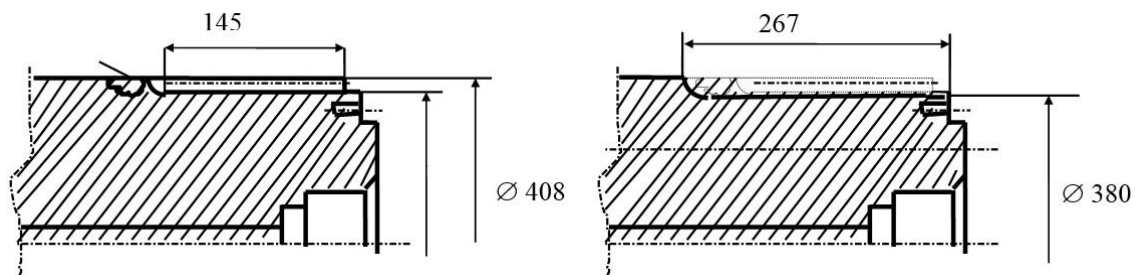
Left) Shaft dimensions before, and Right) after repair welding preparations
